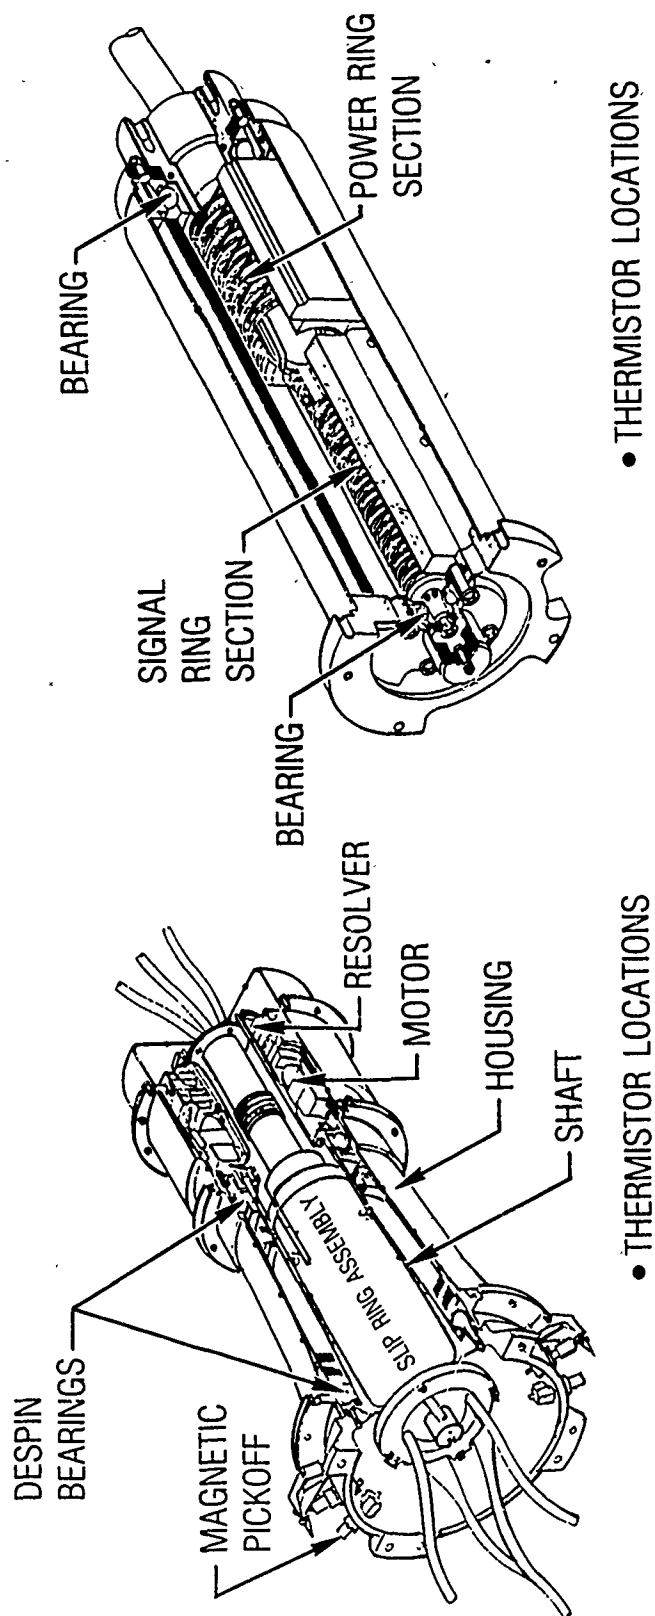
Schematic of a Despin Mechanical Assembly and Slip-Ring Assembly Laboratory Life-Test Fixture (from Ref. 4).
